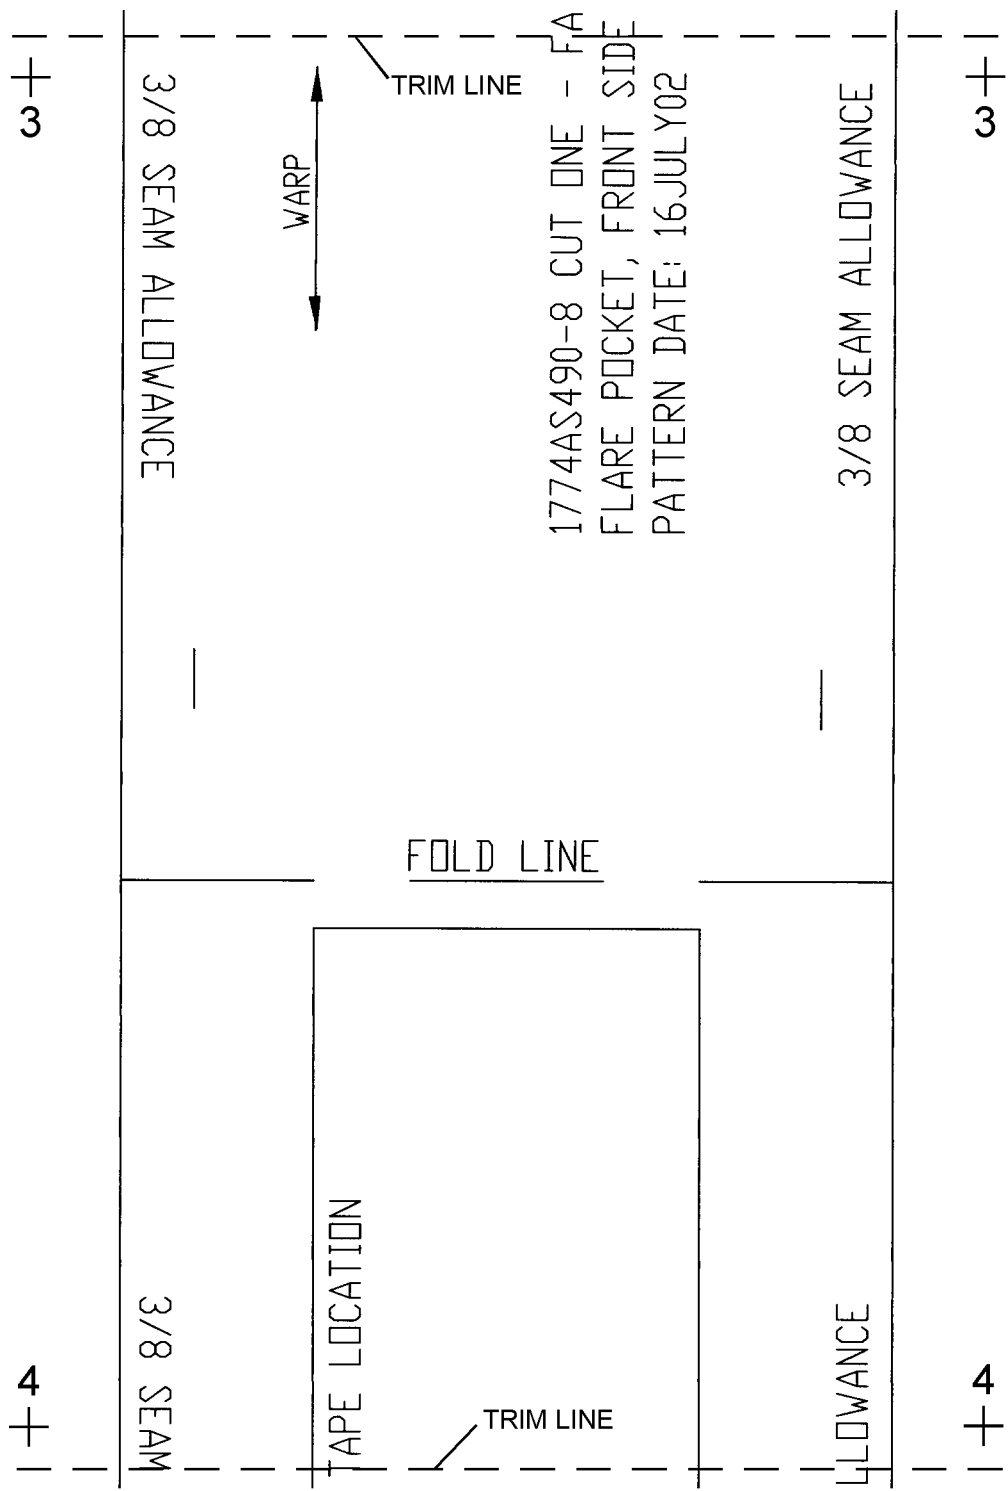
H. Flare Pocket Front Side Panel Pattern (Sheet 4 of 5)
